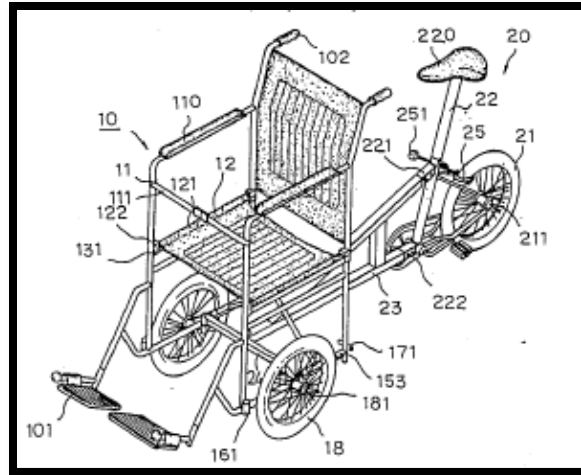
Patent 4830388, Multi-Functional Wheelchair Assembly<sup>25</sup>
